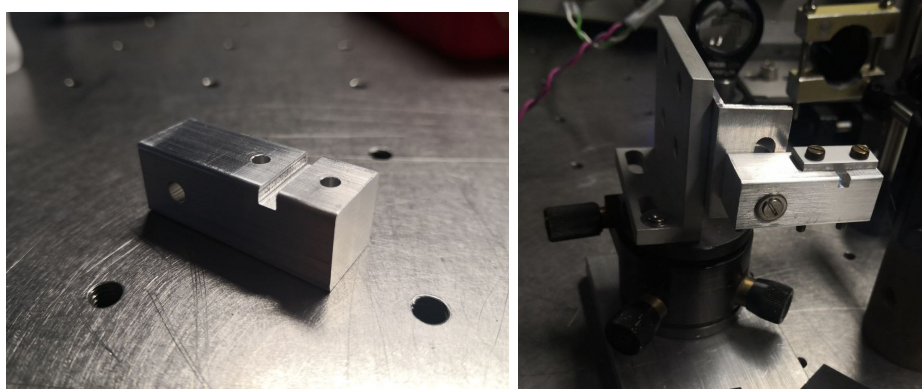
Pictures of the first crystal holder, and a picture of it mounted on the rotating platform.
